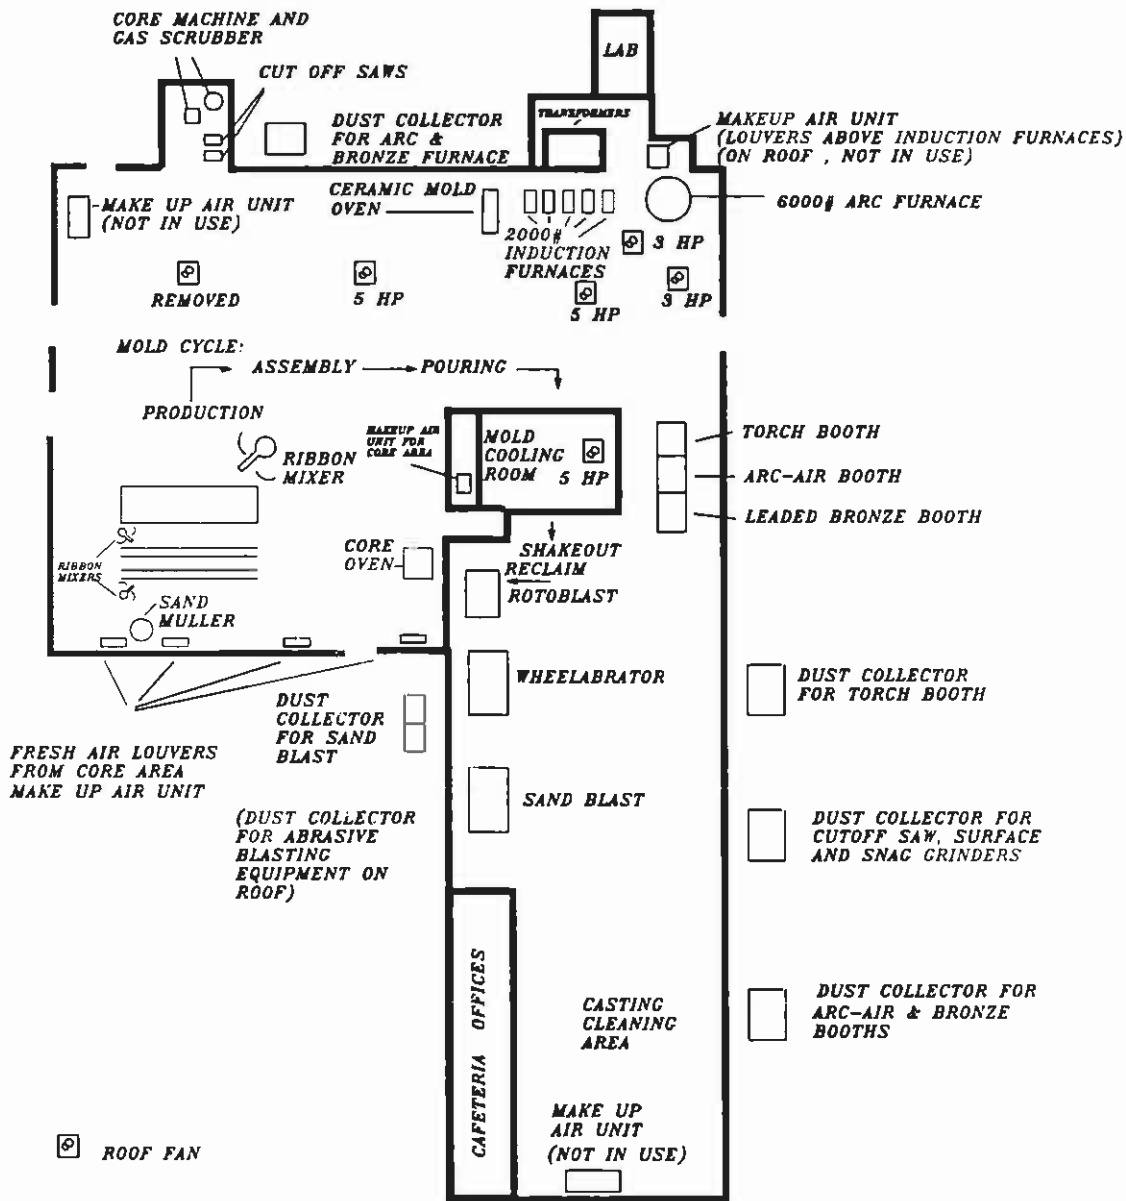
Schematic layout - Ingersoll-Rand steel foundry.
